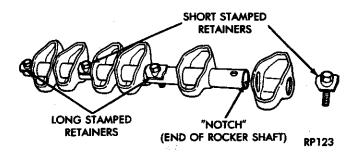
Rocker Arm Retainers and NOTCH Location CYLINDER HEADS
